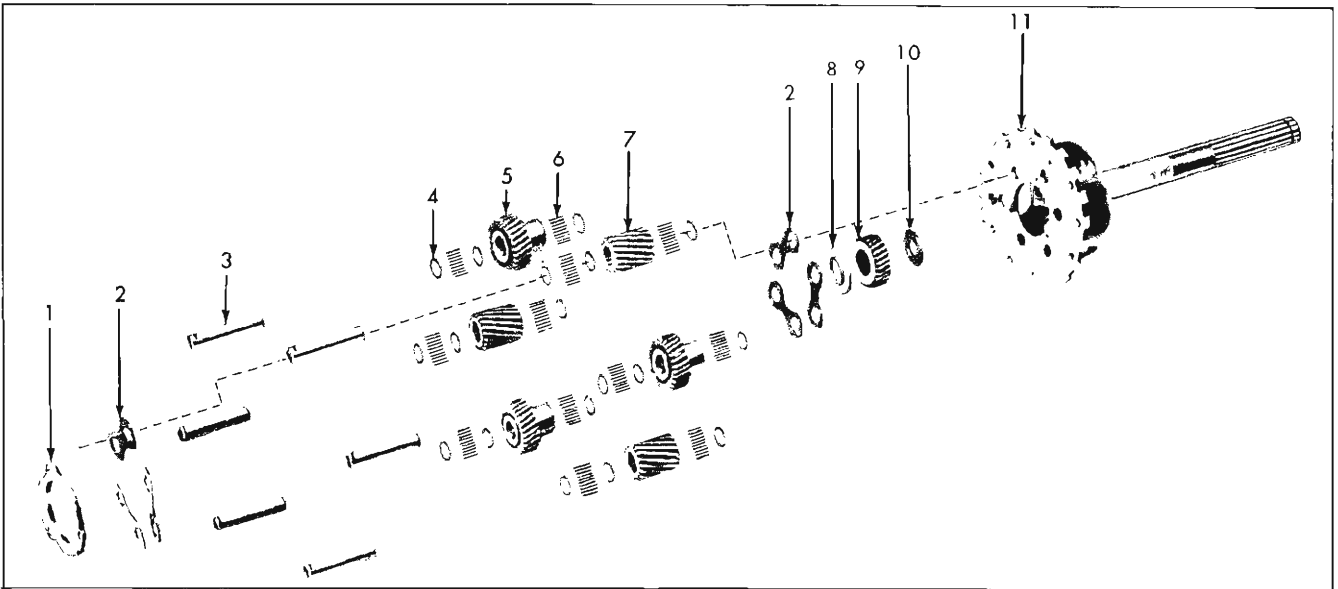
PG—Planet Carrier Assembly—Exploded View (Small Gear Set Shown)
